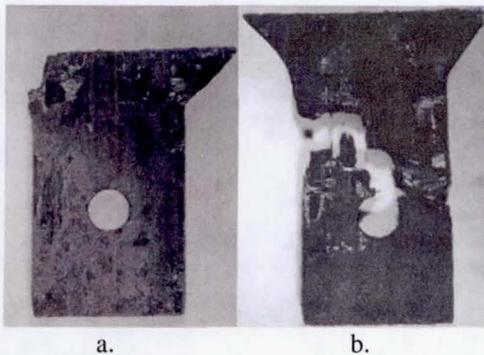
Damage of fasteners after removal from the sector rig.
